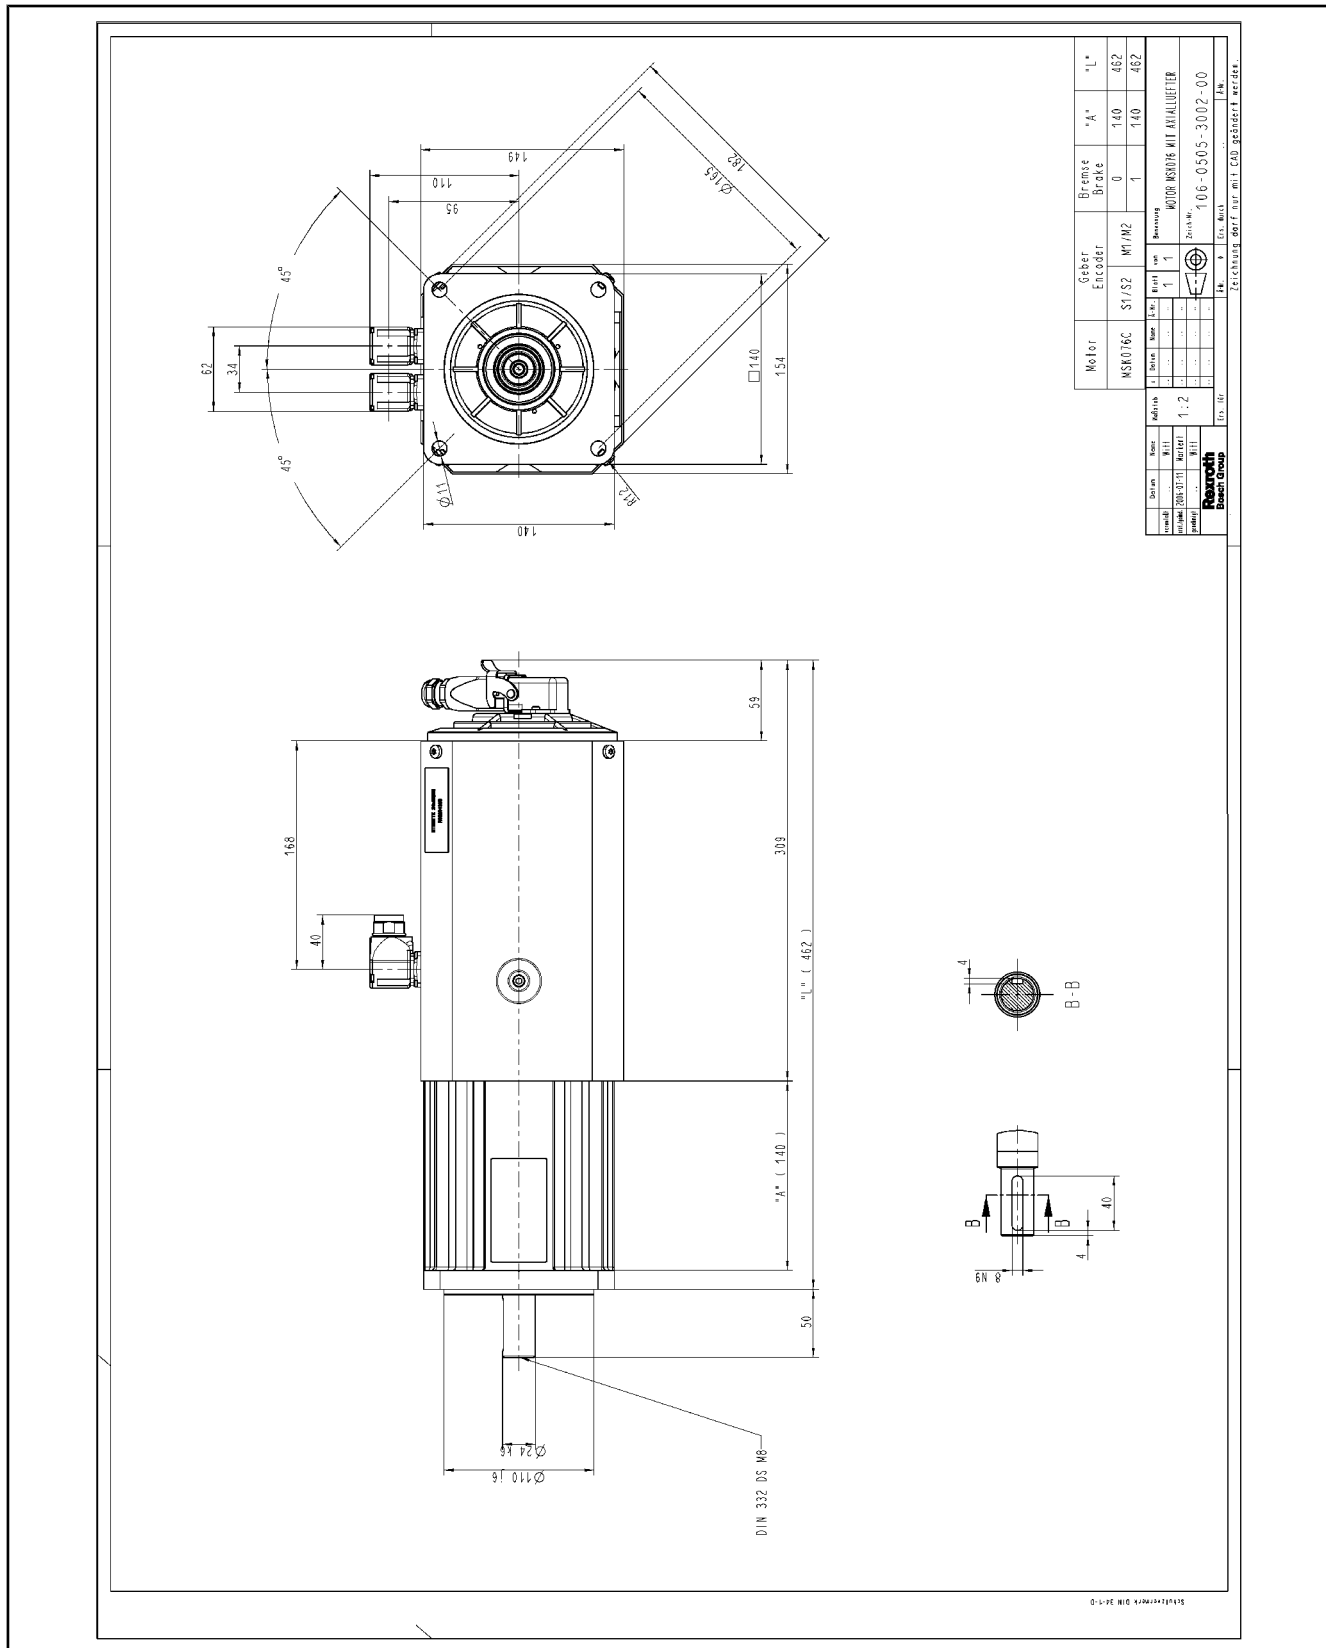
Dimension sheet MSK076 with axial fan unit
